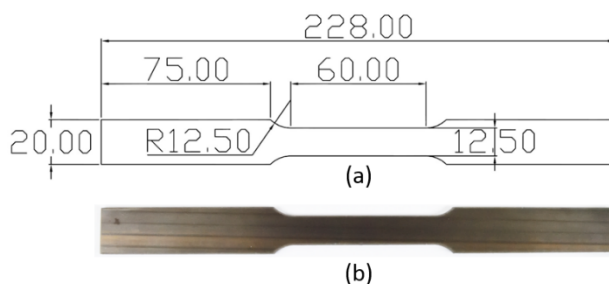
(a) Dimensions and (b) real SK5 steel simple tension specimen
